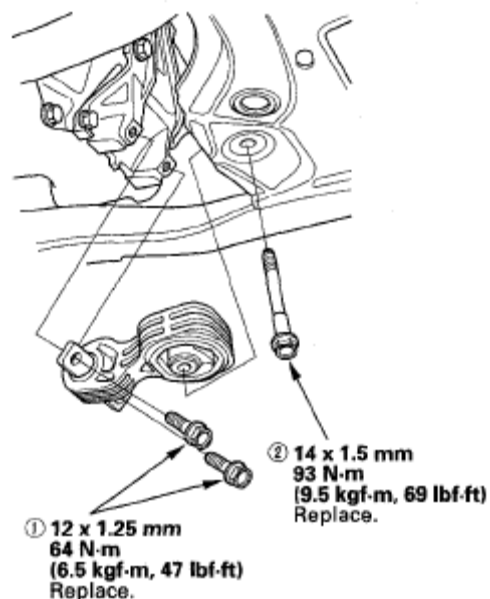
Identifying Lower Torque Rod Mounting Bolts (With Torque Specifications)
